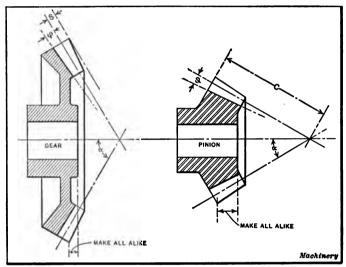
and 8. Additional Dimensions for Gears to be cut by the Templet Planing Process or the Gleason Generating Machine
